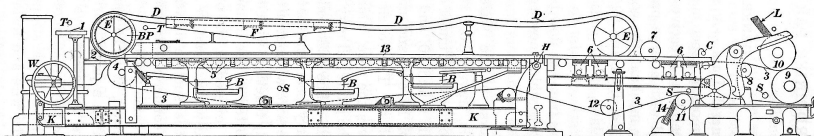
1920<sup>th</sup> Foudrinier paper machine
